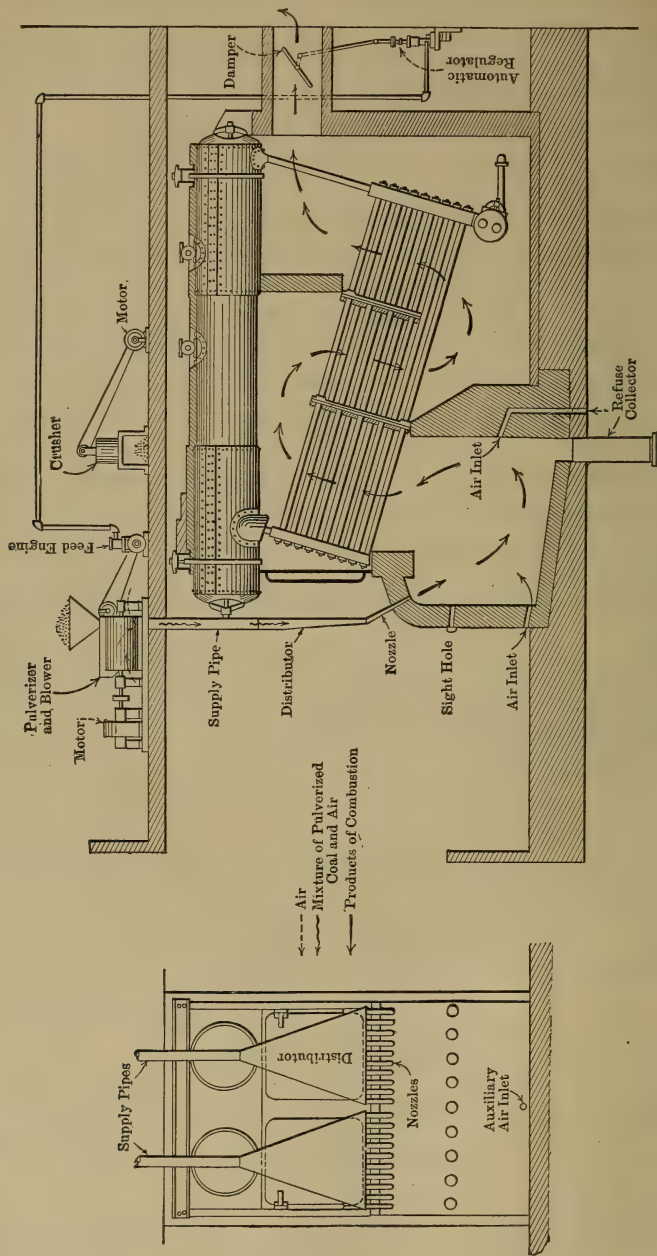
300-h.-p. Boiler with Blake Powdered-coal Furnace.
